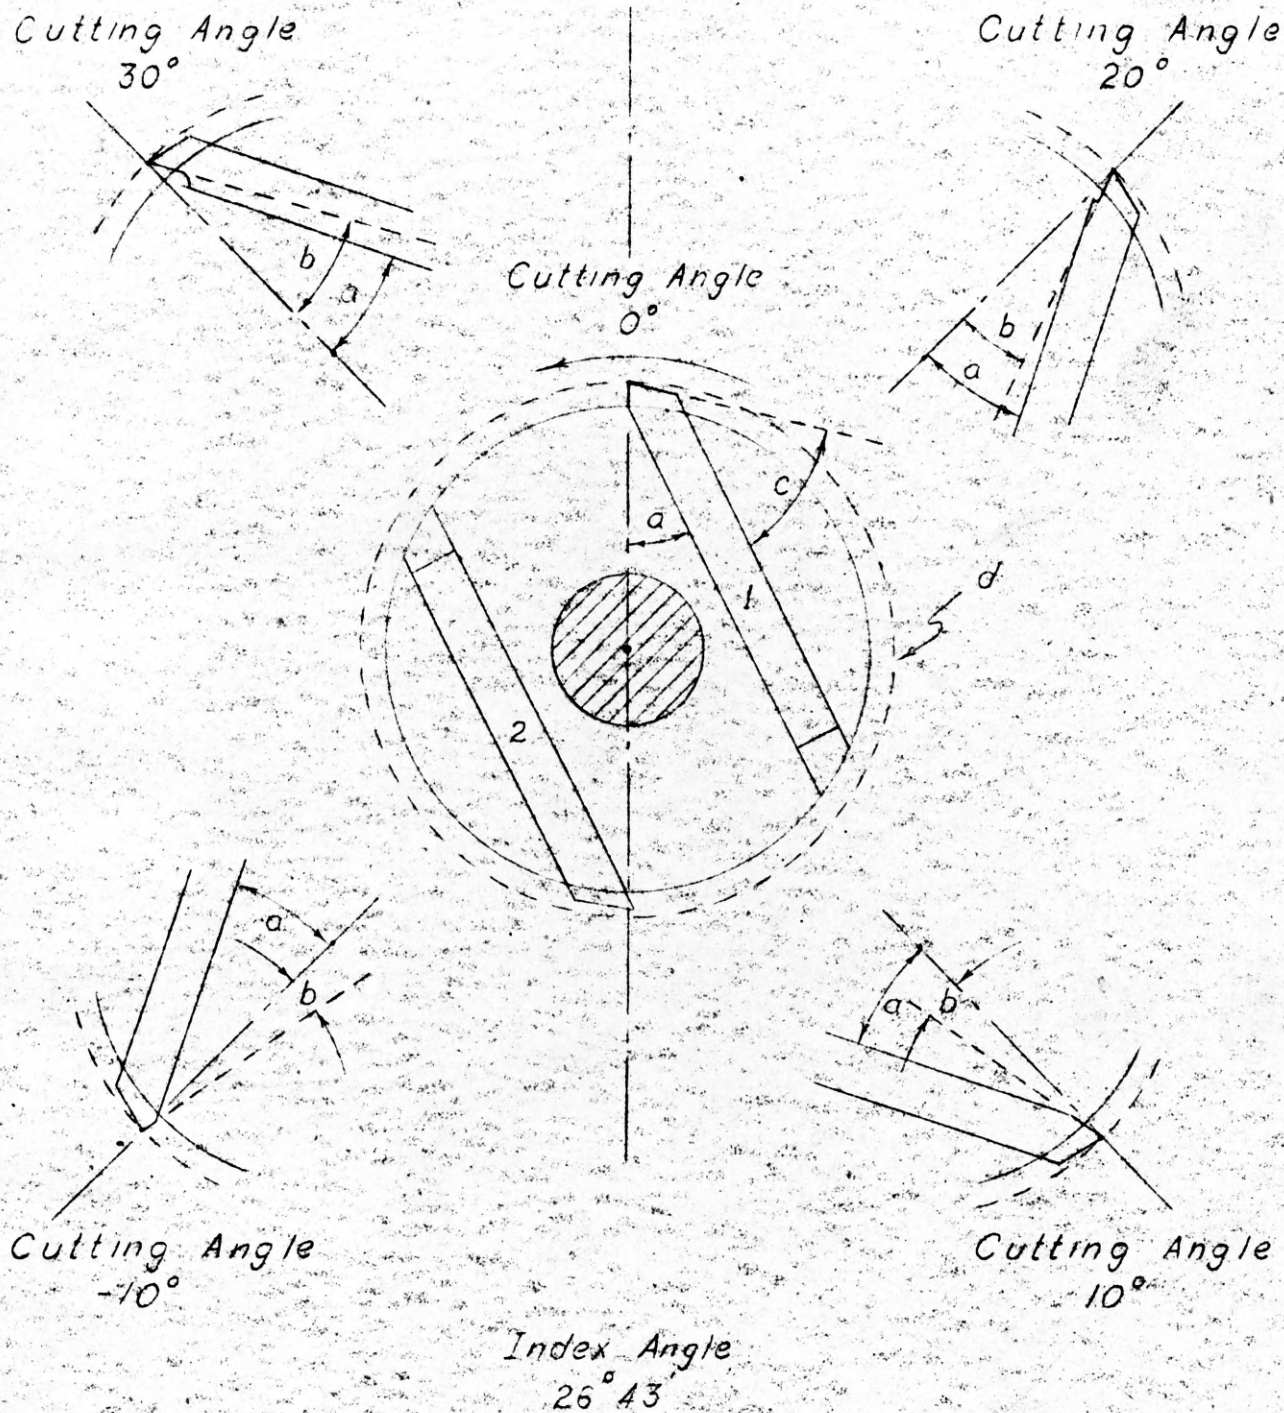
Altering cutting angle by grinding: a, Index angle; b, cutting angle and grinding bevel; c, clearance bevel; d, cutting circle; 1, shaper knife; and 2, filler.
